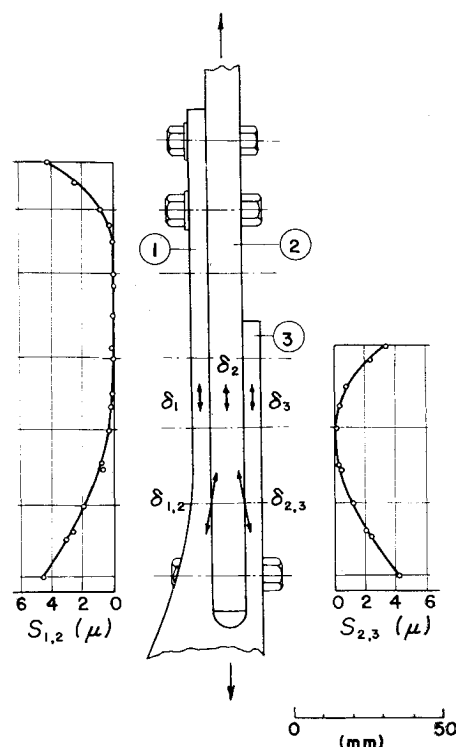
Distribution of slip between bolted flanges of spar-fitting shown.
